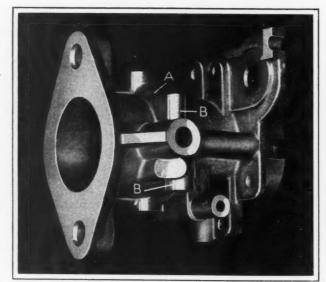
Casting Produced in Dies Equipped with Eight Sliding Cores
